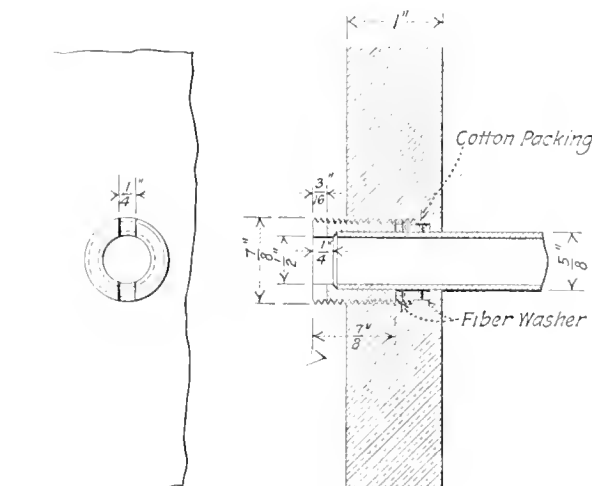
METHOD OF SECURING CONDENSER TUBE IN TUBE SHEET
